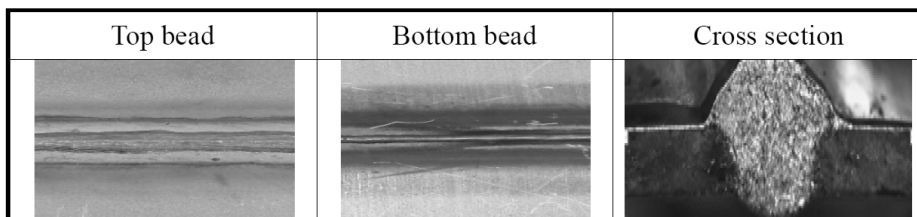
Bead profiles of hybrid butt welded joints.
